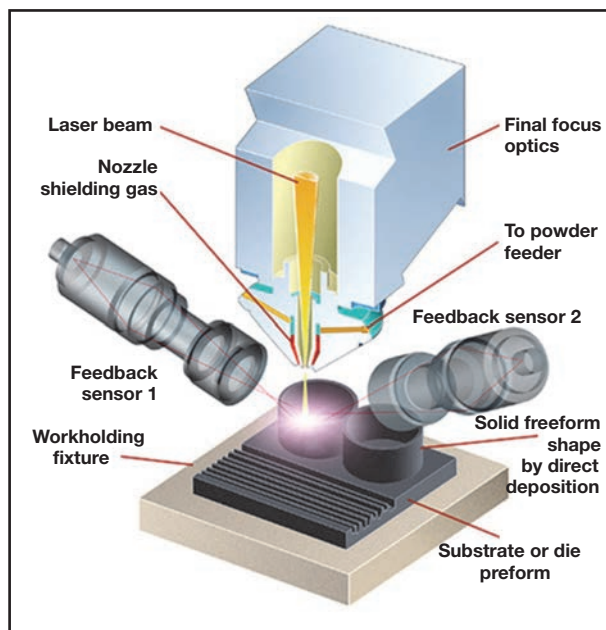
Schematic showing direct metal deposition technology. Courtesy of DM3D Technology.
